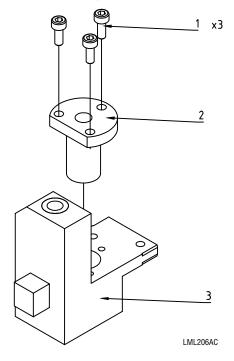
Syringe Motor Guide Block Assembly (See Table 8.2-24)
